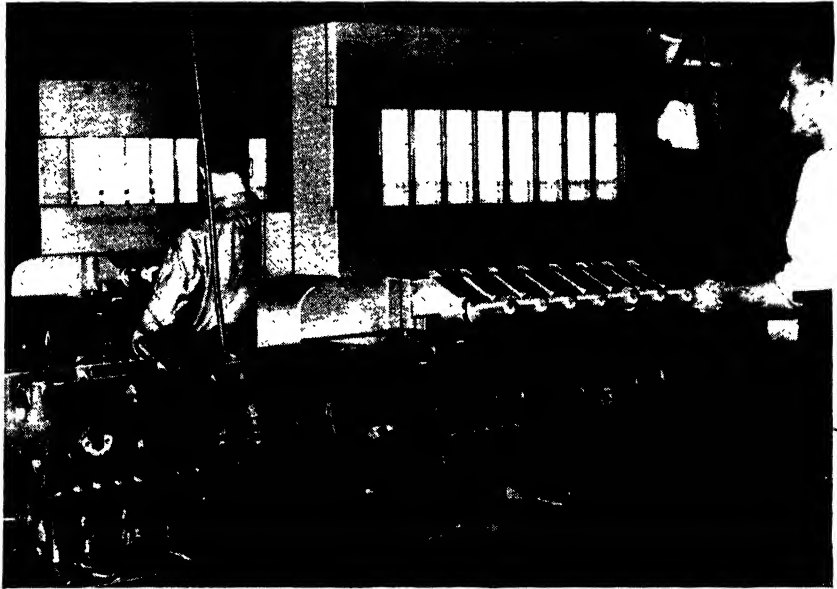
31. Semiautomatic multiple-dimension air gaging machine for checking automotive cylinder blocks. (*Courtesy of The Sheffield Corporation.*)
